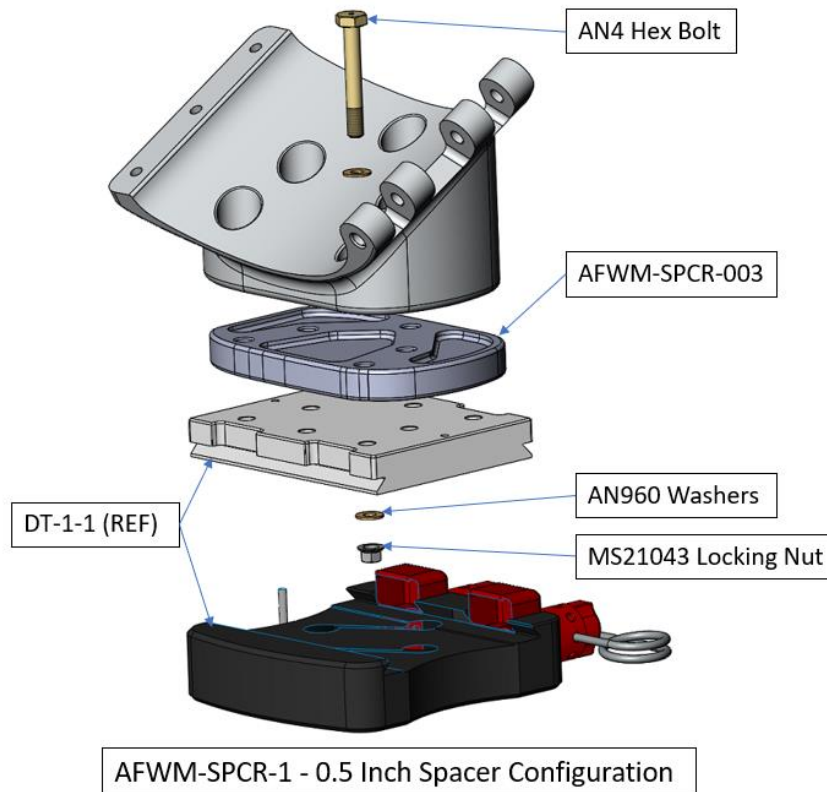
Exploded view of AFWM-SPCR-1 Assembly with Reference DT-1-1 Quick Disconnect
